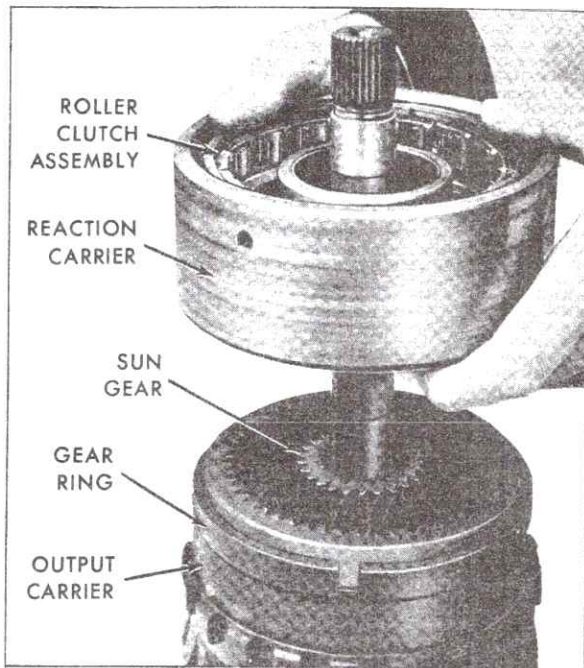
Removing Reaction Carrier and Roller Clutch Assembly
